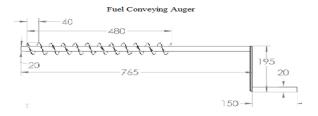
Front view of the screw auger conveyor (All dimensions in mm)
